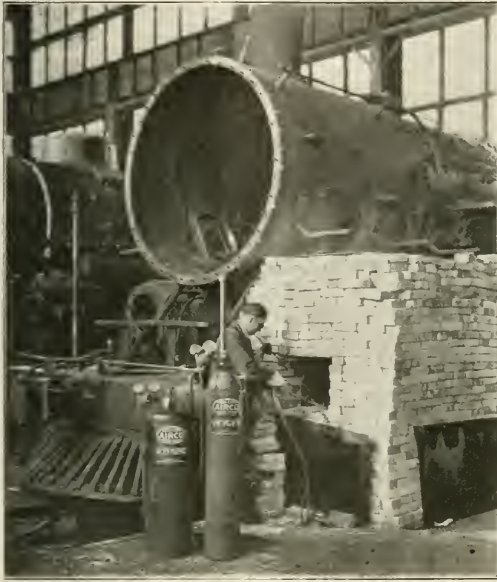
Broken Locomotive Cylinder Bricked Up for Welding
